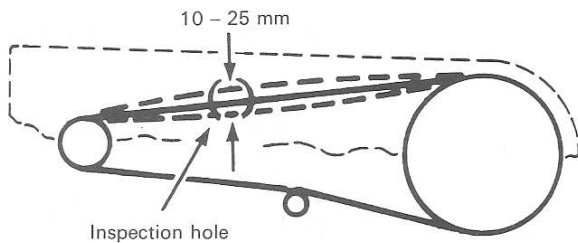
Checking the drive chain free play (always measure at the tightest point) (Sec 3)
